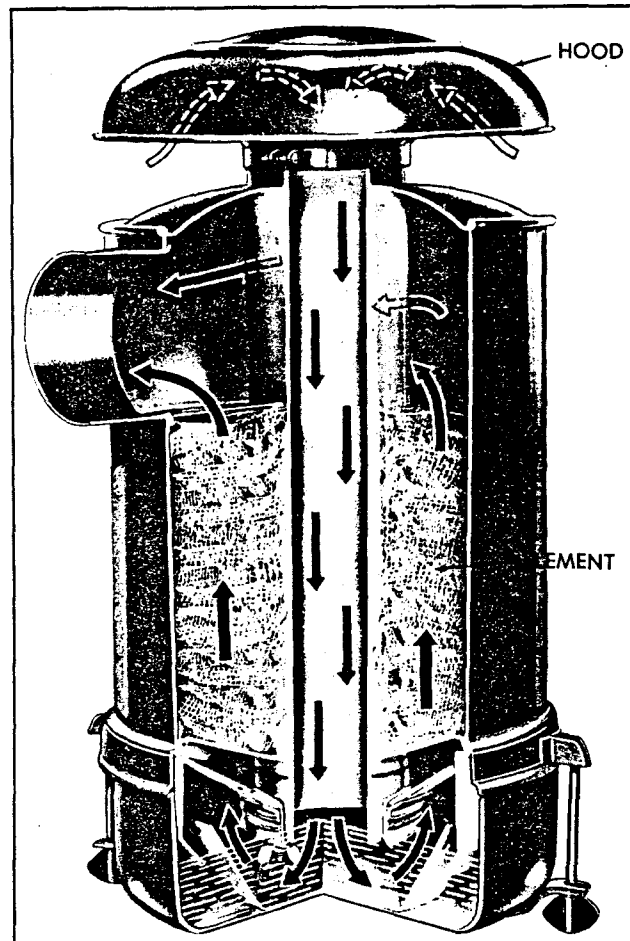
Typical Heavy-Duty Oil Bath Air Cleaner
